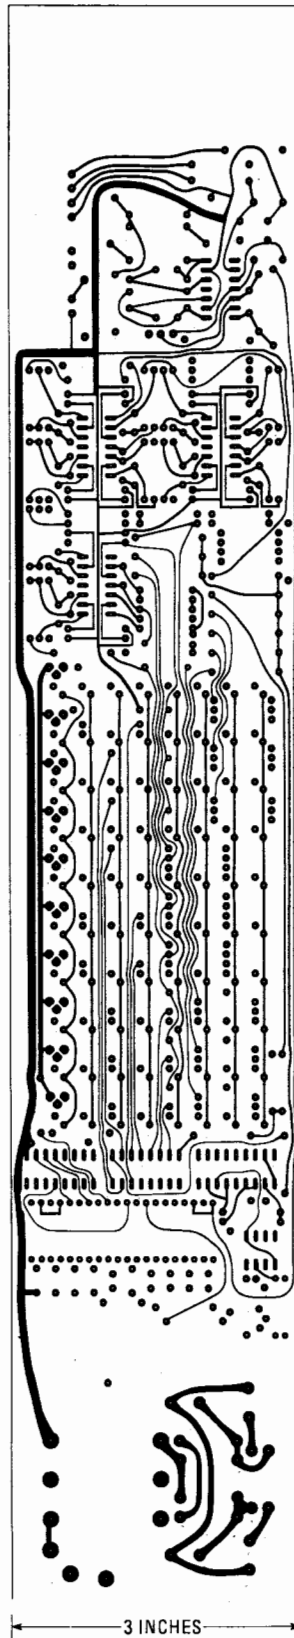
THE COMPONENT SIDE of the analyzer circuit board is shown here half-sized.
